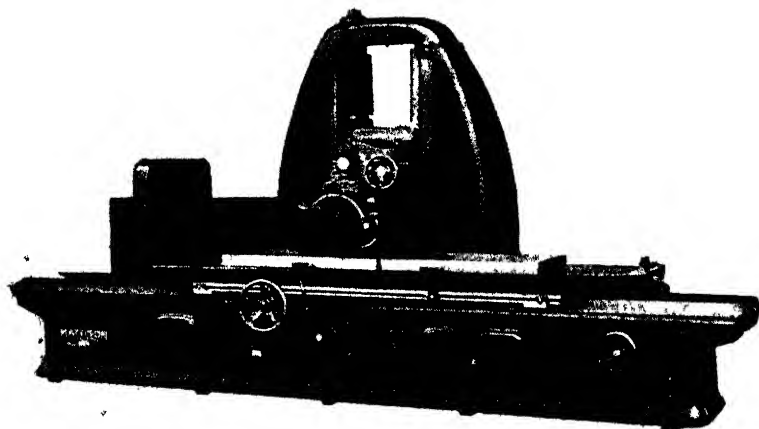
Planer type of surface grinder. (*Mattison*)
